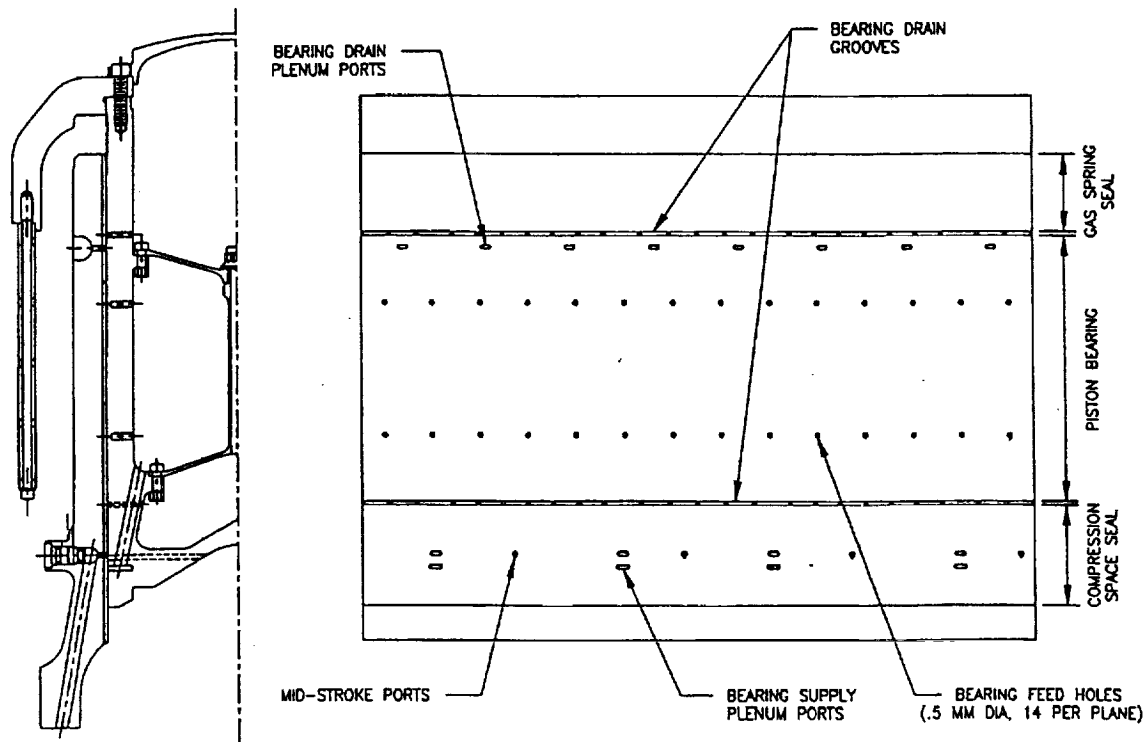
Arrangement of Internally Pumped Bearings and Seals in Power Piston Drive
